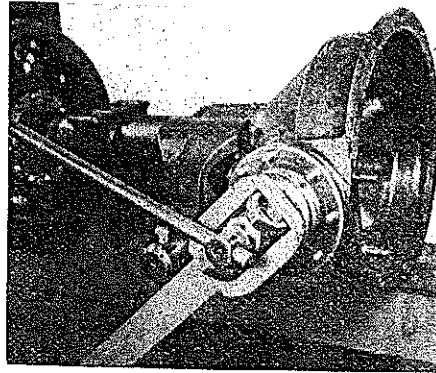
Secure yoke with holding tool and remove pinion shaft nut and washer
